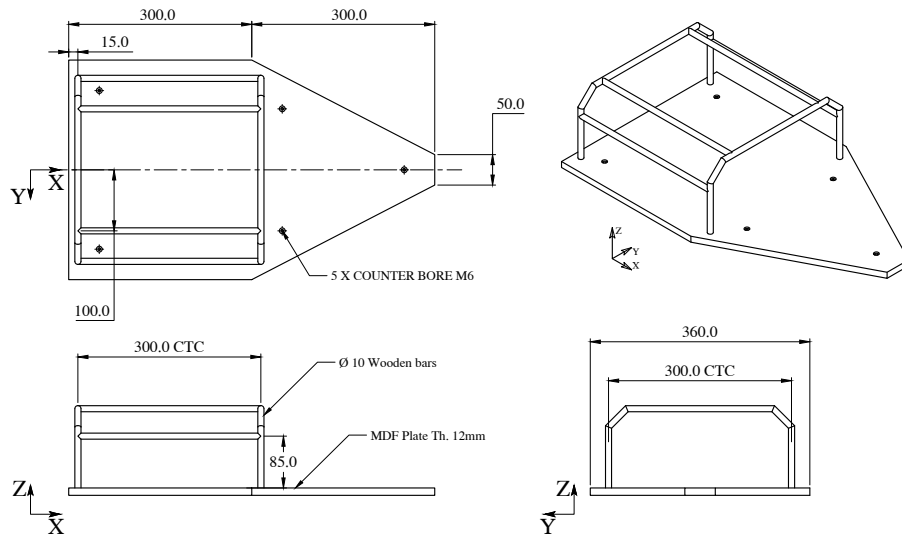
Proposed design of the interchangeable plate intended to enclose the EGM components, with dimension specific in millimeters
